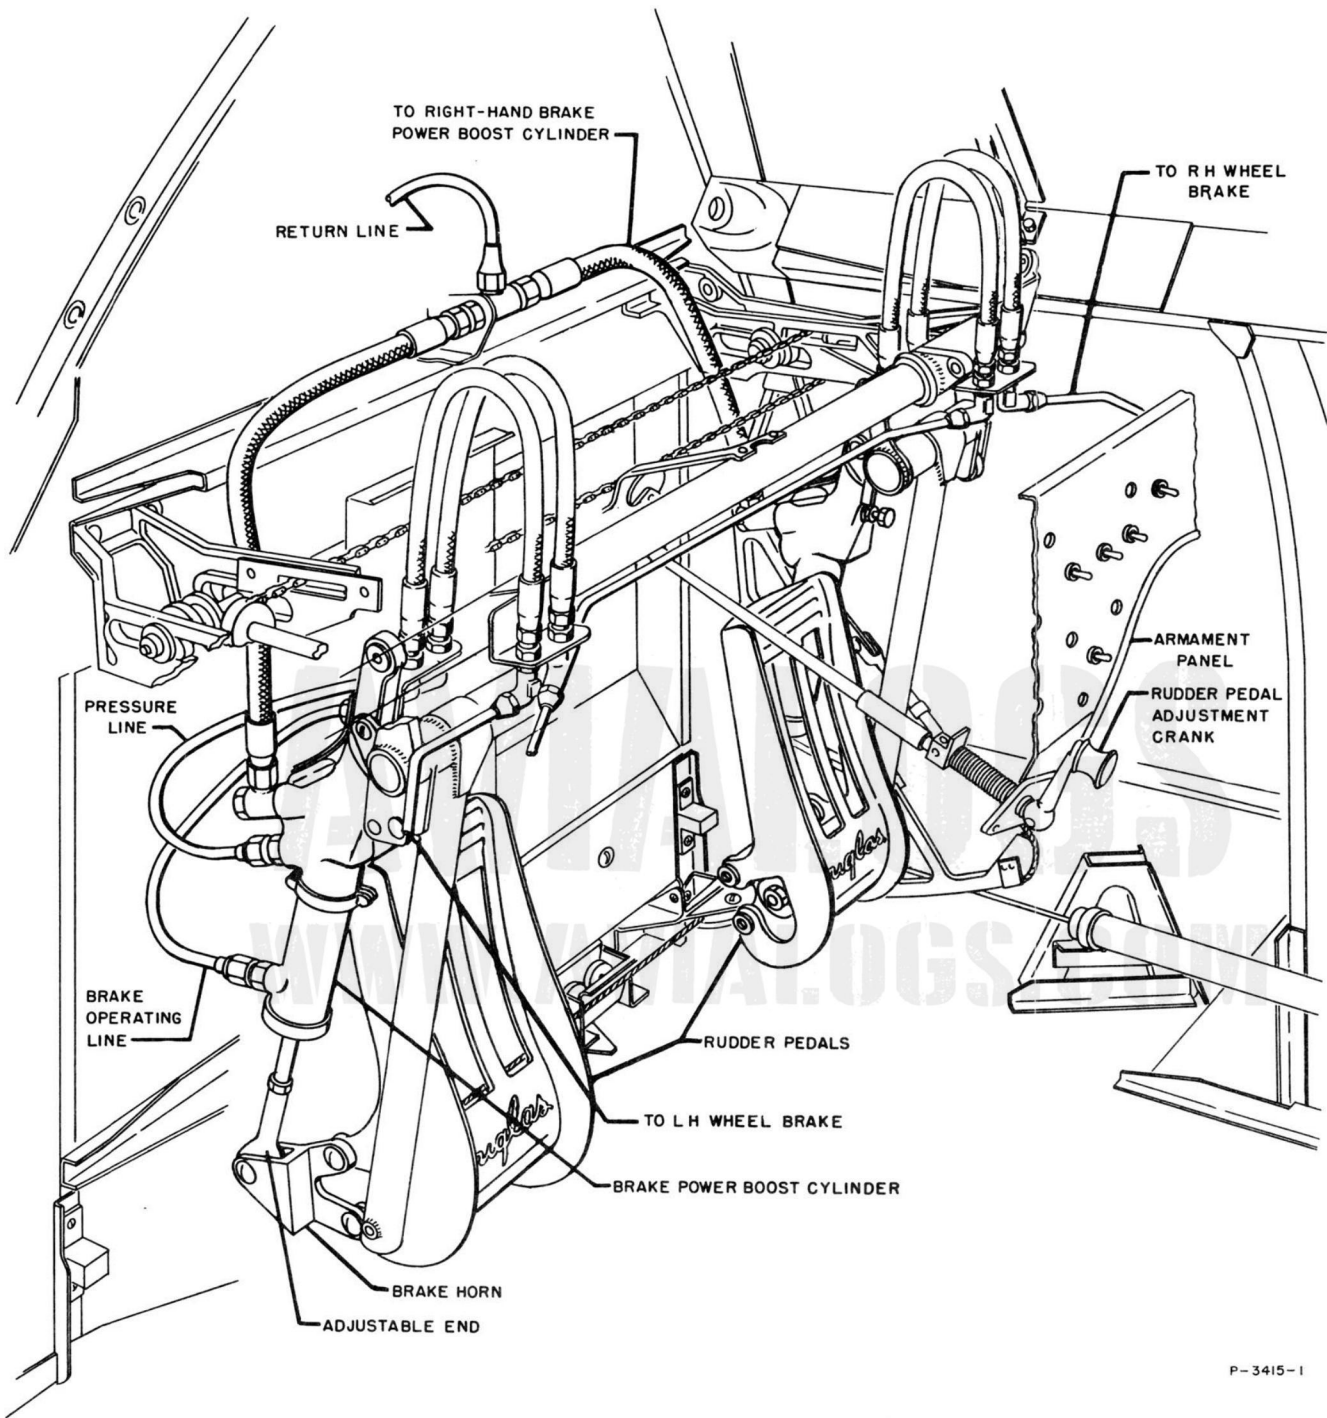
Main Landing Gear Brake Control System (Sheet 2)
